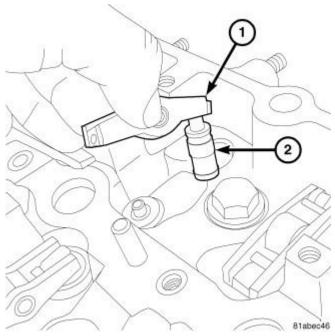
ROCKER ARM AND LIFTER ASSEMBLY Courtesy of CHRYSLER LLC
